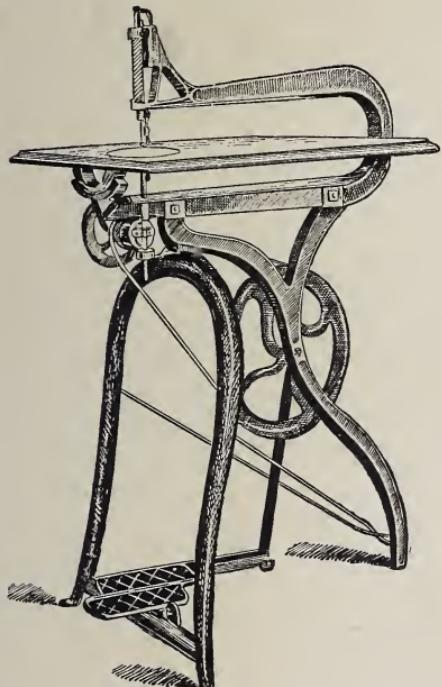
THE BRITANNIA, NO. 7 TREADLE MACHINE.
